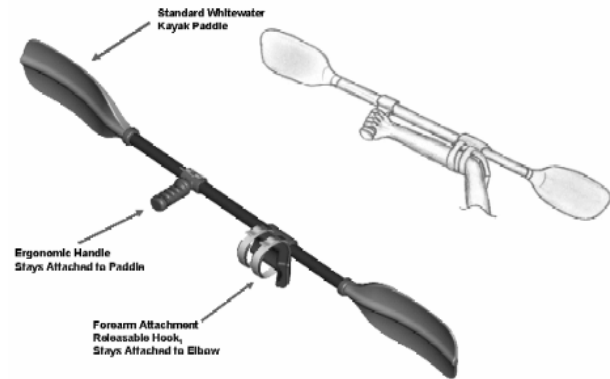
Solid Model and Hand Drawing of Paddle and Attachments.
